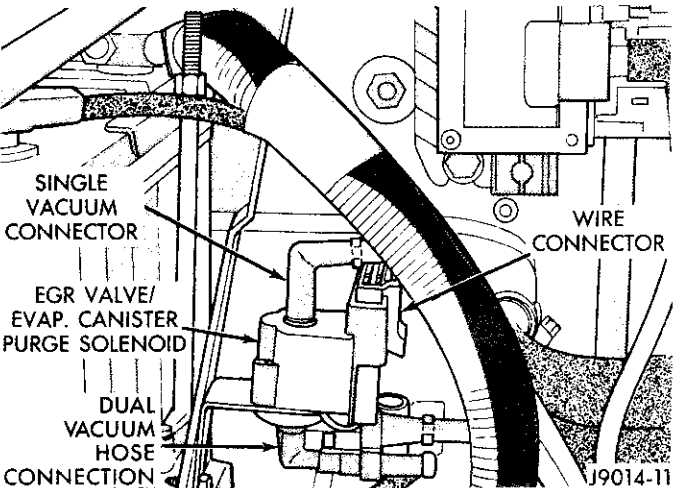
YJ EGR Valve/Evaporative Canister Purge Solenoid Remove/Install
